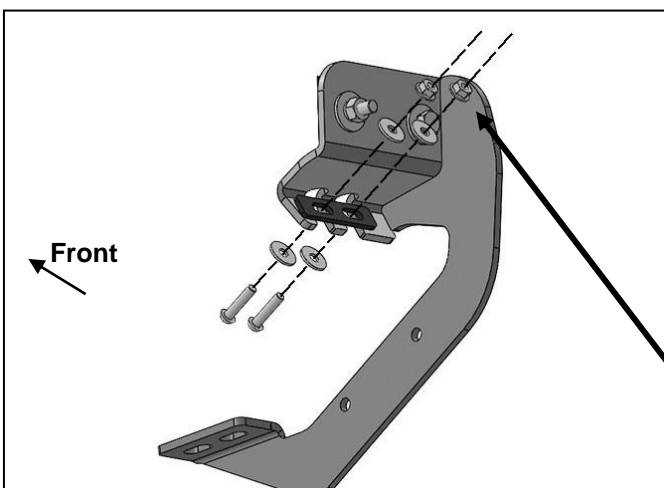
Attach Bracket to the threaded hole in the Bolt/Nut Plate
